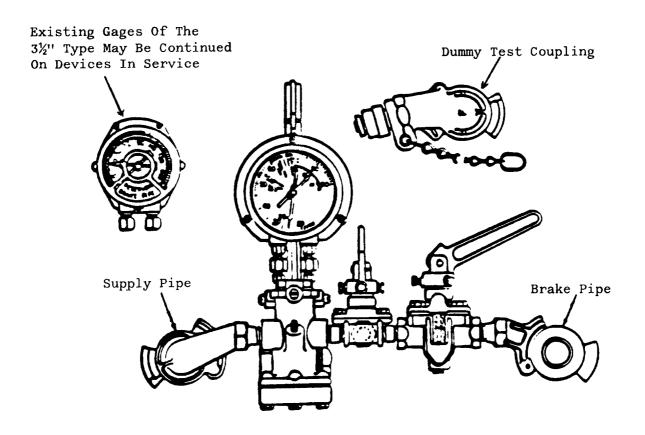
OUTLINE OF FREIGHT SINGLE CAR TESTING DEVICE WITH FLOWRATOR
